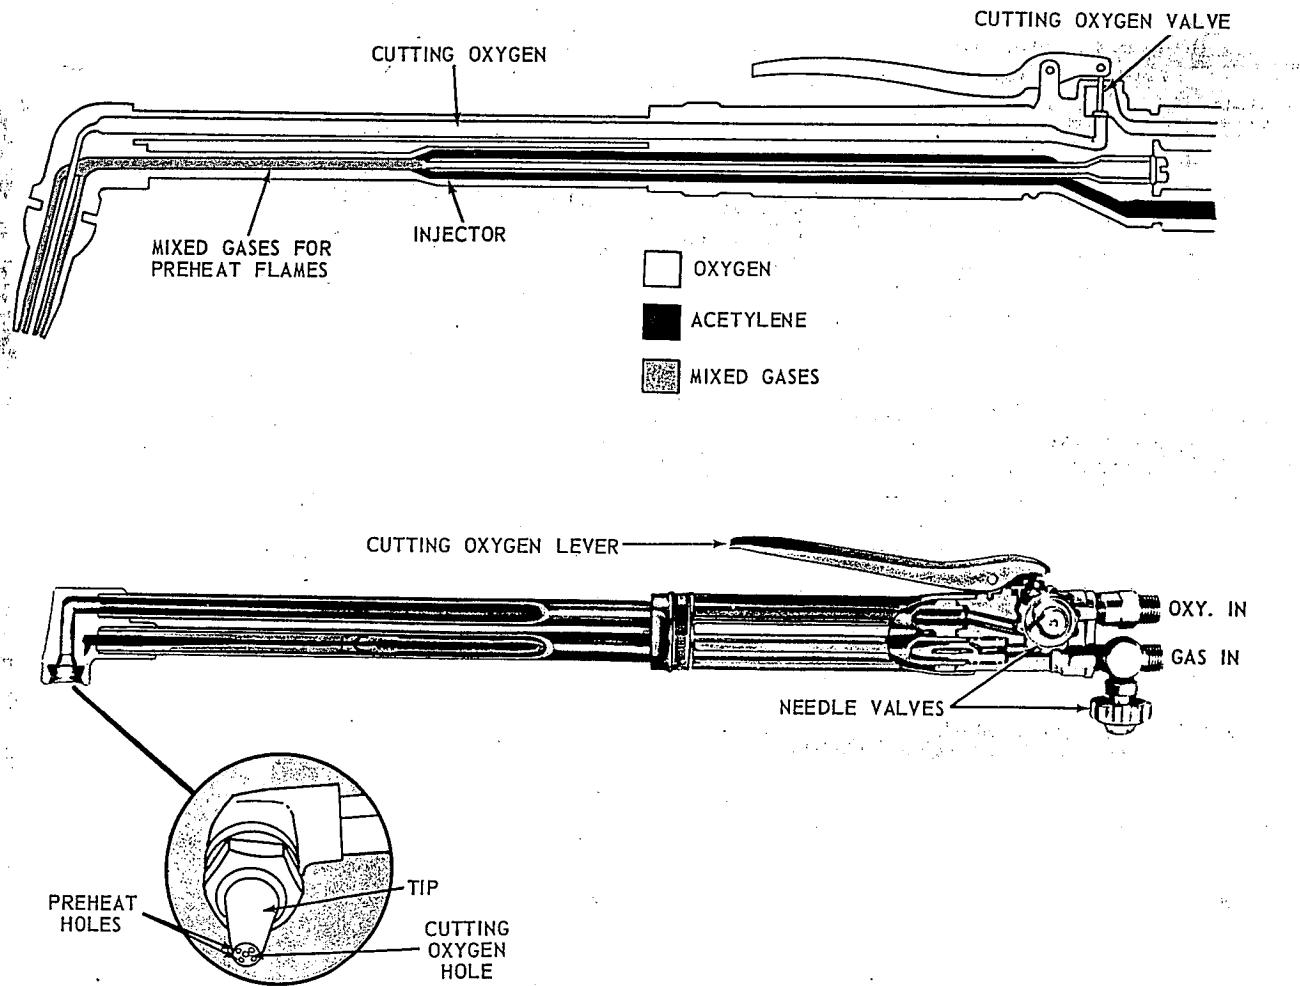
Oxyacetylene Cutting Torch And Tip
